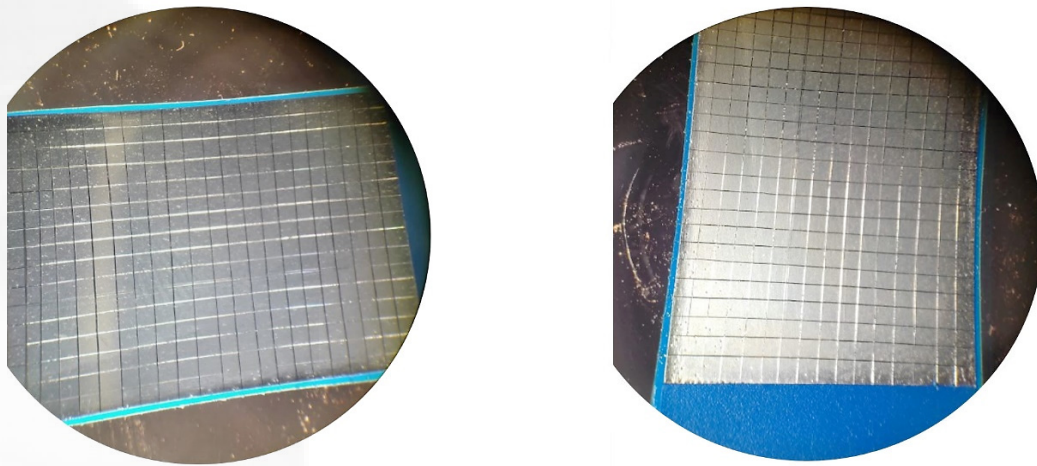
The initial phase of cross-hatch testing, the process of drawing a cross-hatch on a nickel coating
